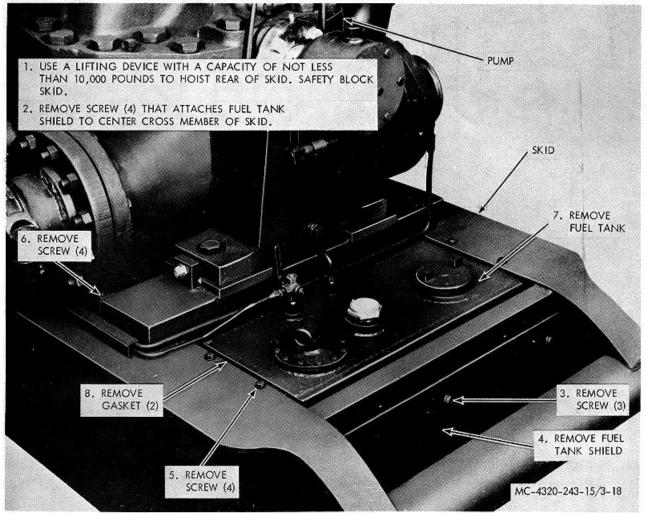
Fuel tank shield and fuel tank, removal and installation.
